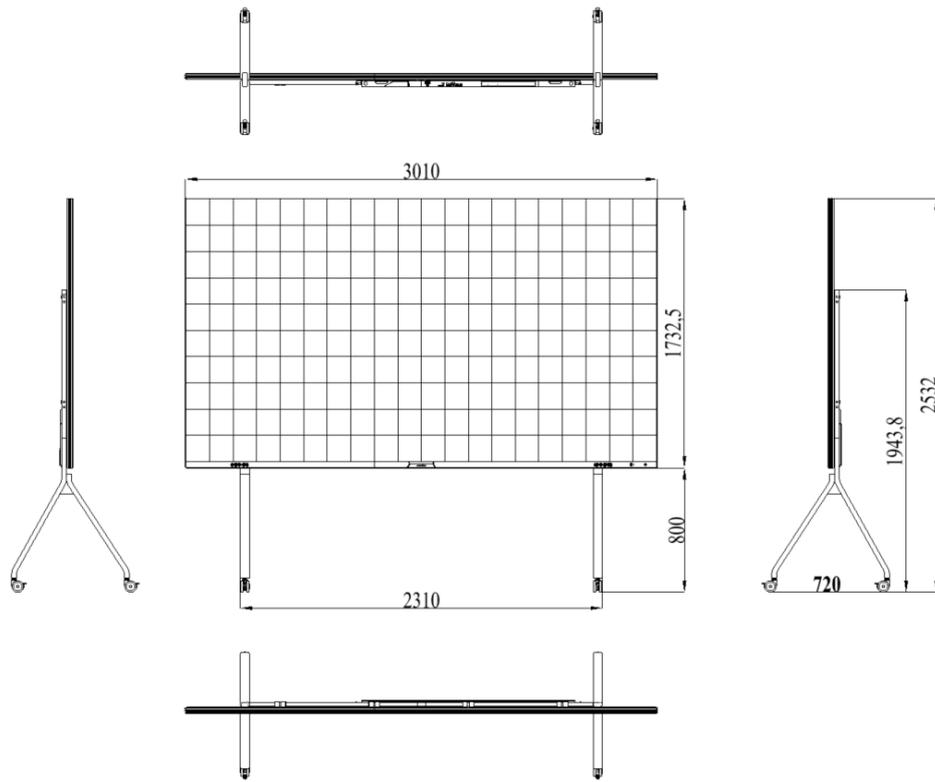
The dimensional drawing of non-touch version mobile stand X136
